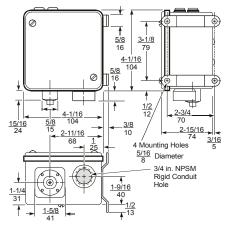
Dimensions for P70, P72, and P170 Pressure Controls with NEMA 3R Enclosures, in. (mm)
